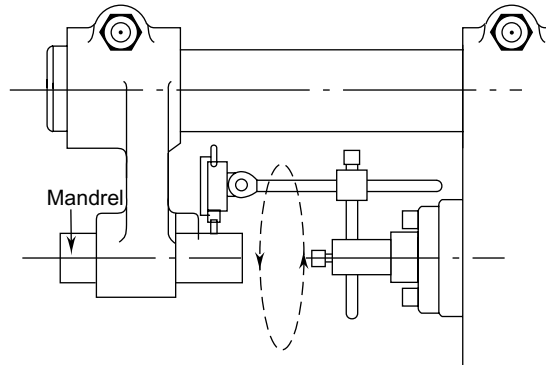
Test setup for true running of the spindle of a radial drilling machine
